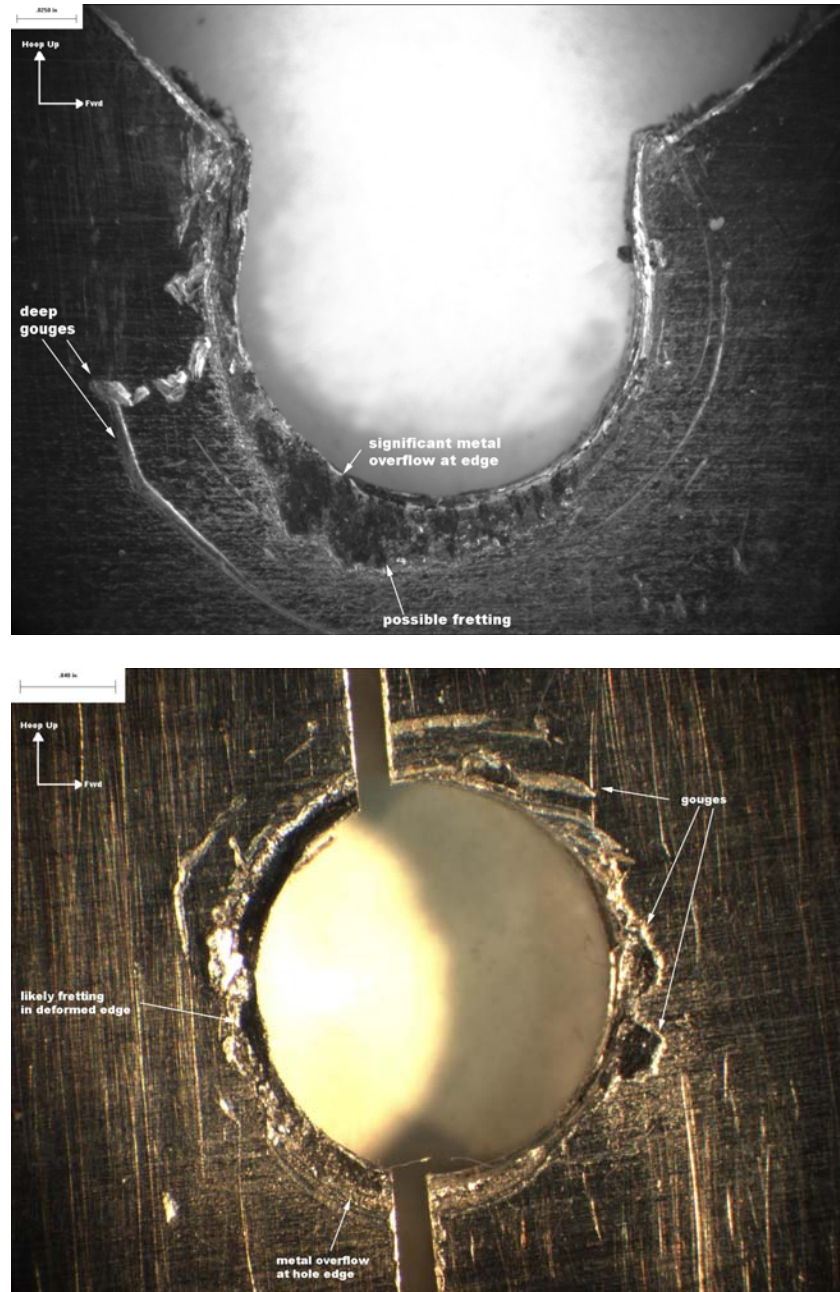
Examples of fretting damage observed for some rivet holes from the teardown inspection (faying surface, right hand side panel joint)
